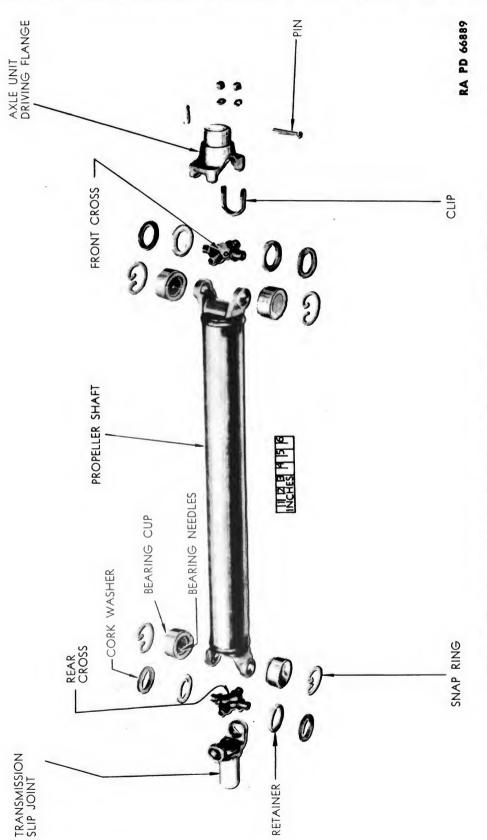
Propeller Shaft, Universal Joints, Transmission Slip Joint, and Axle Unit Driving Flange Parts
